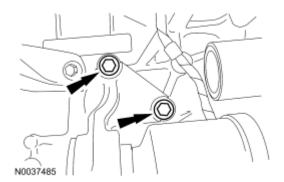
Locating Bellhousing-To-Oil Pan Bolt Courtesy of FORD MOTOR CO.
